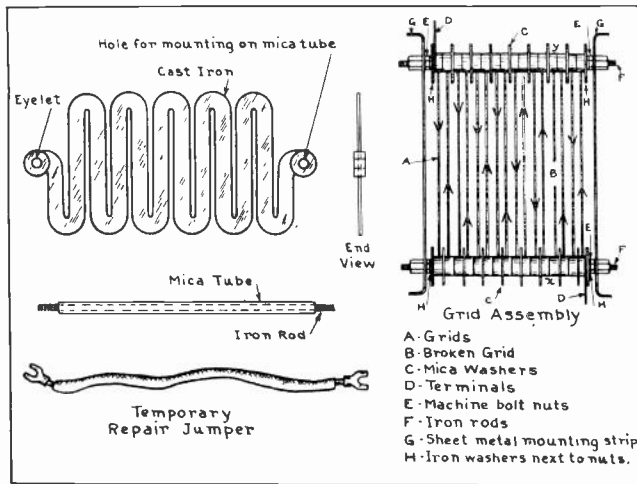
Sketches showing construction of iron grid type secondary resistors for slip-ring motors. Also note the jumper used for making temporary repairs to open circuited units.
